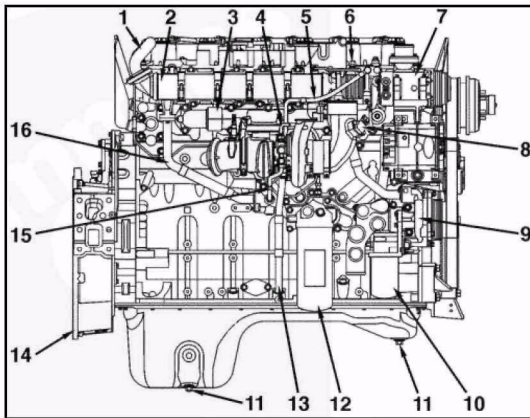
Whole Engine Left Side View Diesel & CNG
